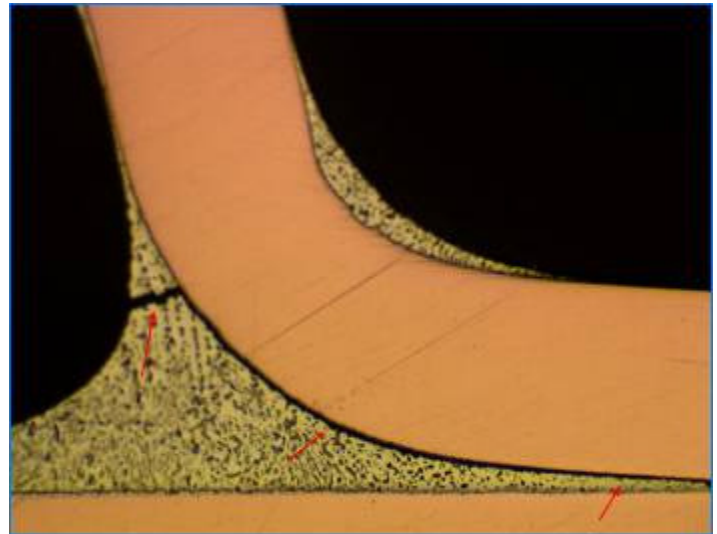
cross section, SN68, U31, right lead solder crack, 200xa
